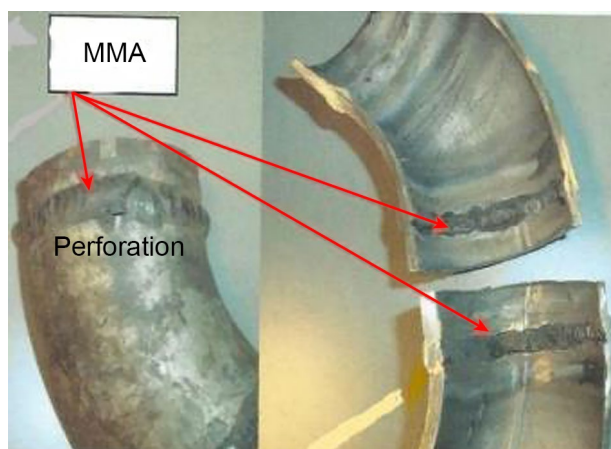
Poor welding resulted in dissolution/corrosion of weld-root at one side (MMA) weld of the elbow
